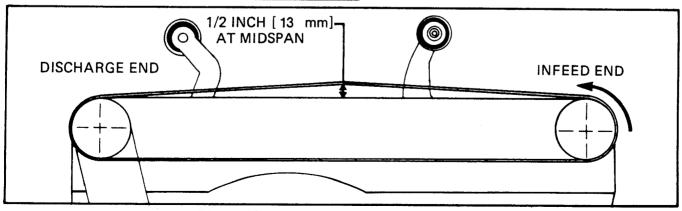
B - BOX DRIVE BELT TENSION ADJUSTMENT
